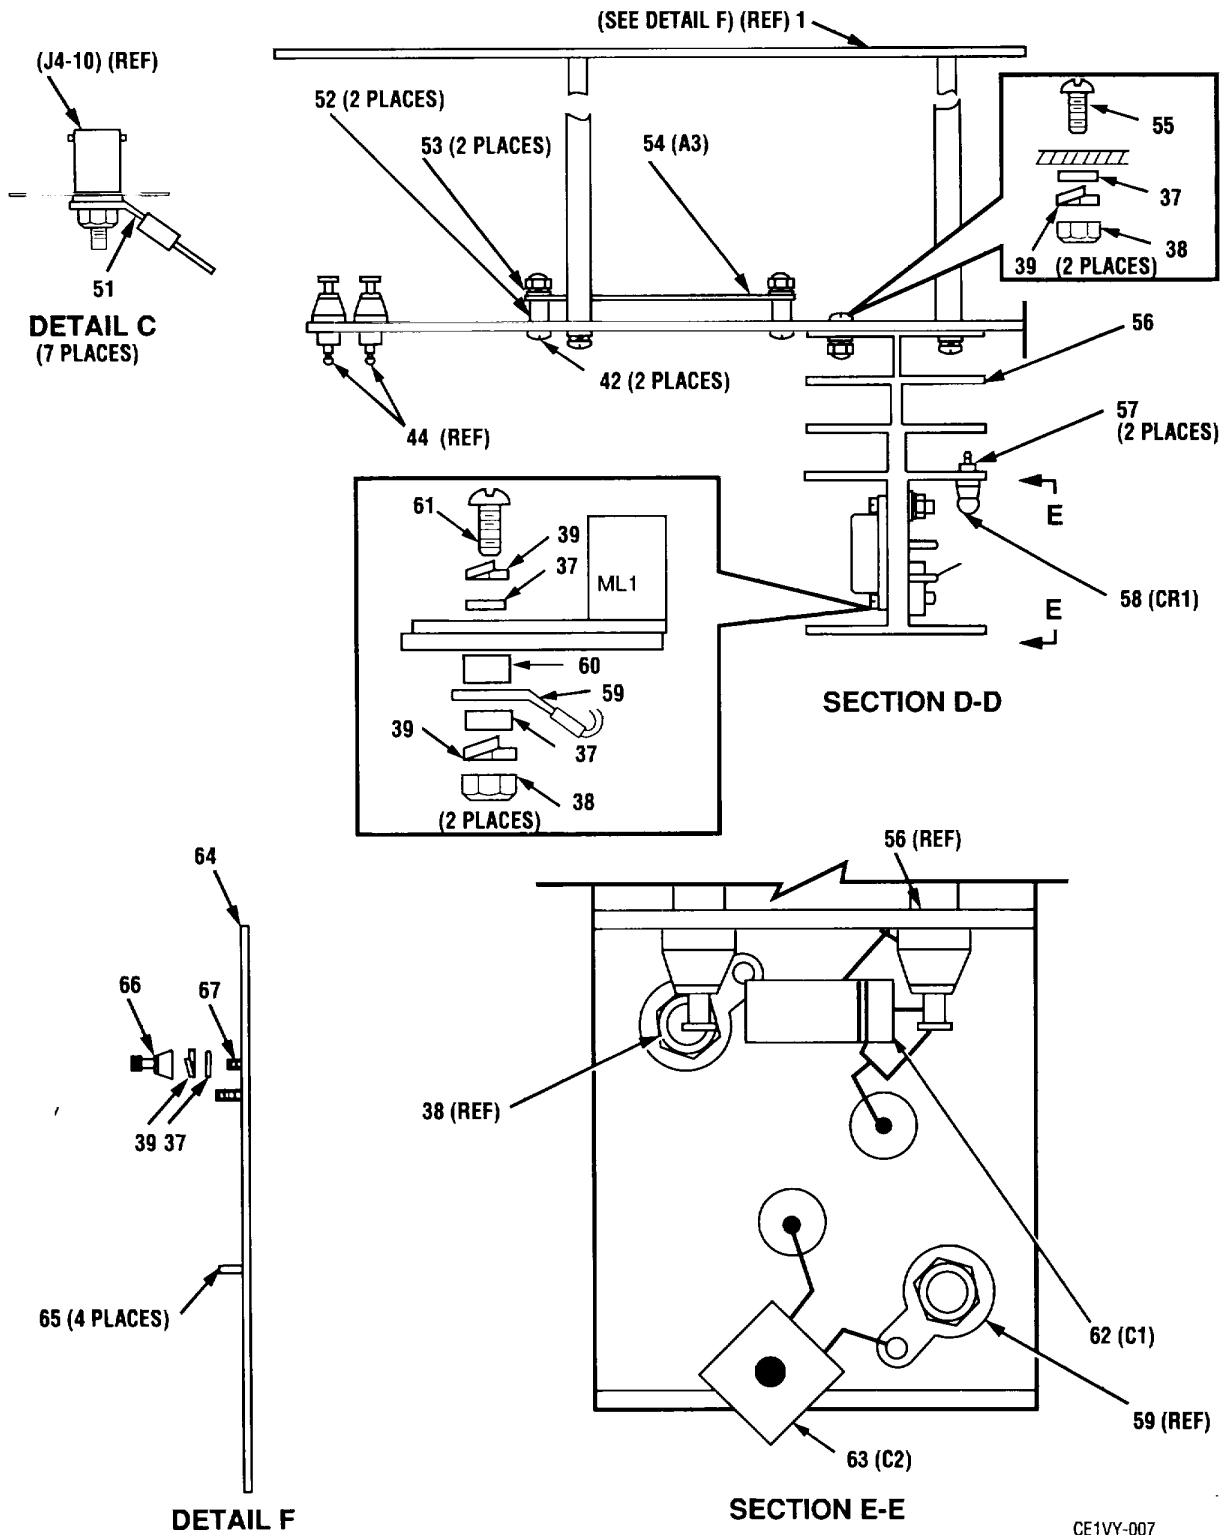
Front Panel Assembly (1-94284.0000//A) (Sheet 5 of 5)
